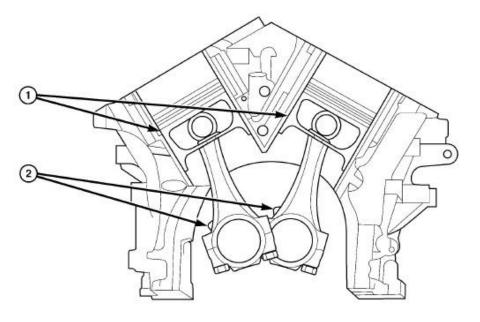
Piston & Connecting Rod Positioning Courtesy of CHRYSLER LLC
